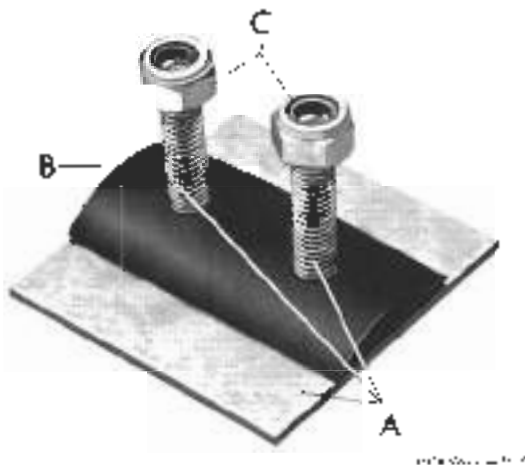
Stud plate assembly. A. The rubber seal is at B, the self-locking nuts are at C. The studs are welded to the plate, but the rubber seal can be removed.
